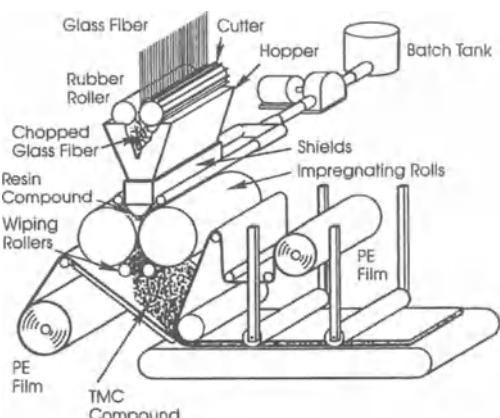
Schematic producing thick sheet molding B-stage material.
